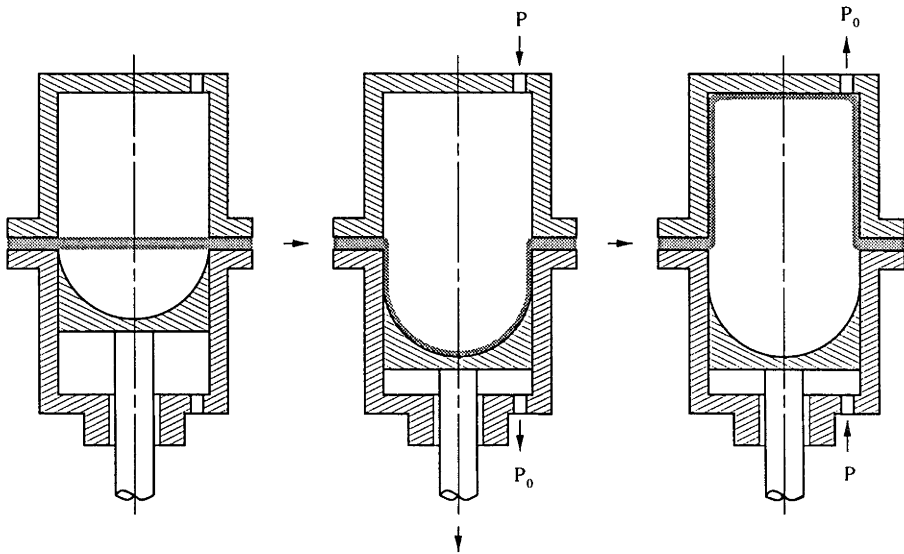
Apparatus for thermo-forming superplastic sheet materials using a concave die member to control thinning in forming of a hat configuration.
